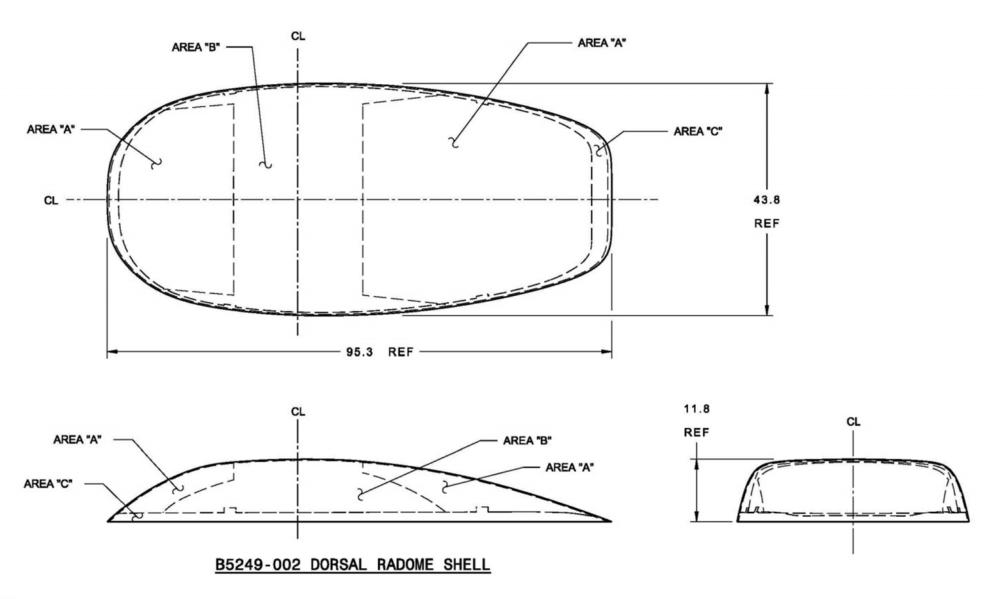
(Sheet 4 of 6) Fuselage Mount Radome Outline and Installation Drawing (90401395, REV D)
